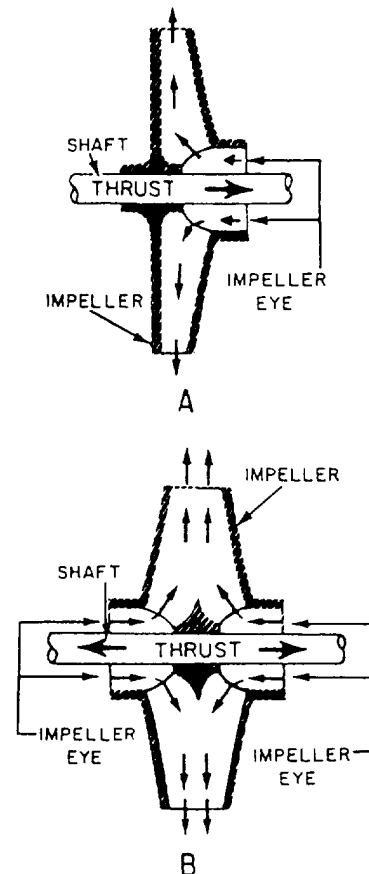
Centrifugal pump impellers. A. Single-suction. B. Double-suction.
